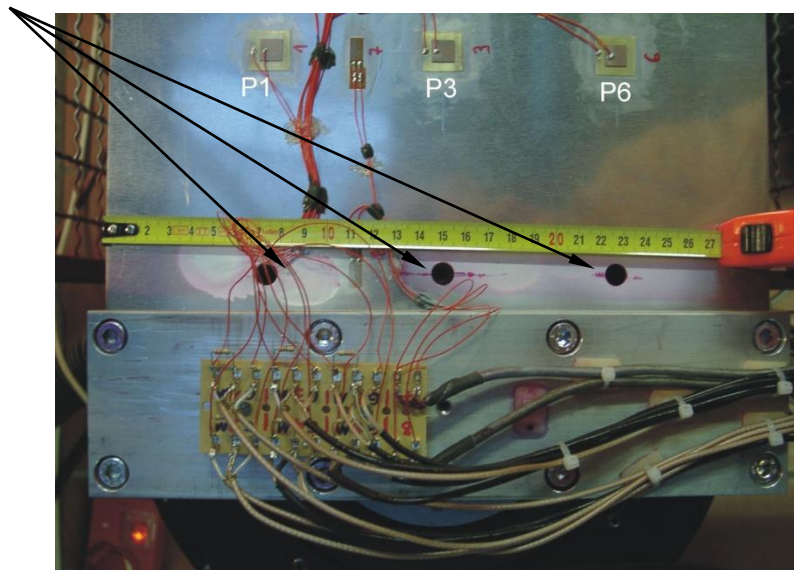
Fatigue cracks in the plate made visible using dye penetration
